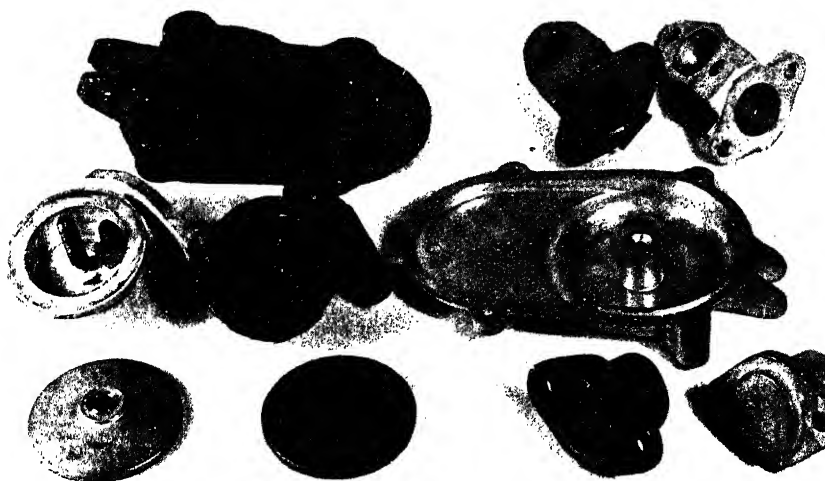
Zinc-base alloy die-castings and the iron castings they replaced
